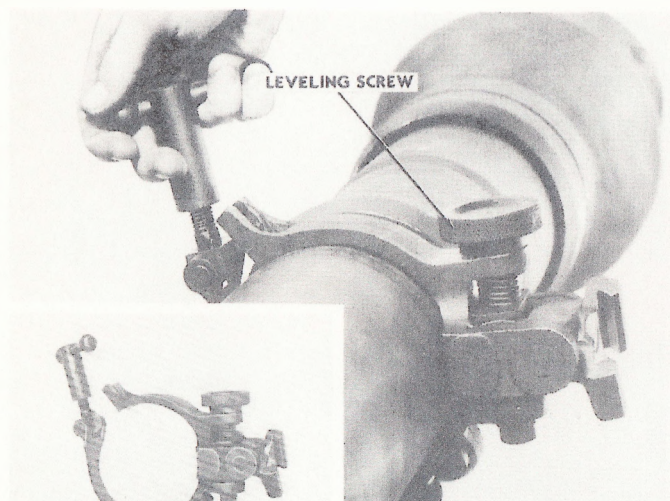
Securing sight clamp to tube. (Insert) Sight clamp.
